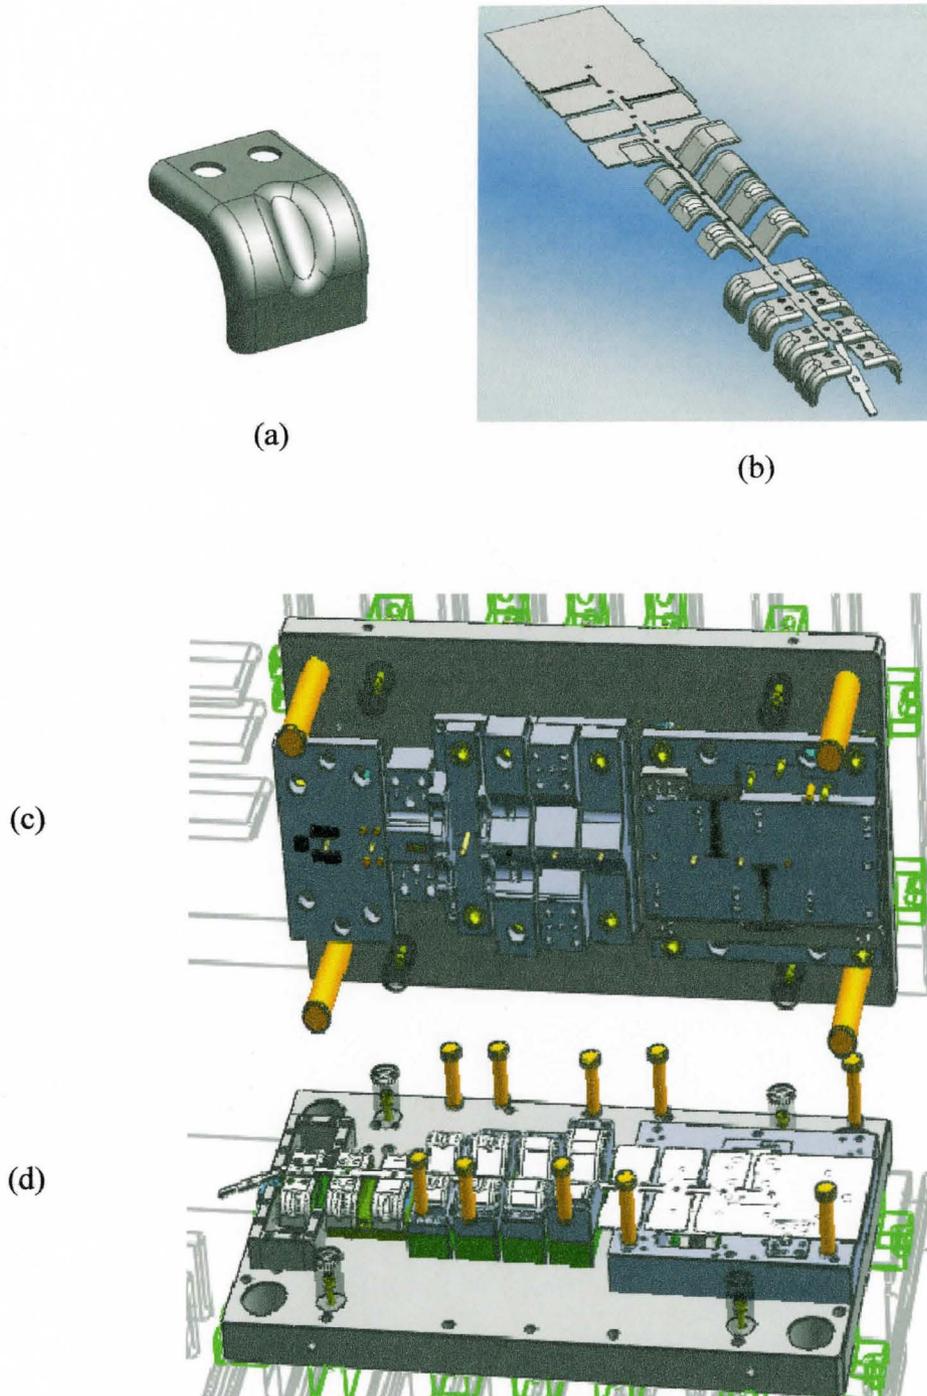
Elements of progressive die (a) part, (b) strip layout, (c) die -top half and (d) die- bottom half, [http://www.ugs.com/products/nx/docs/dfs_mach_series_progress.pdf].
